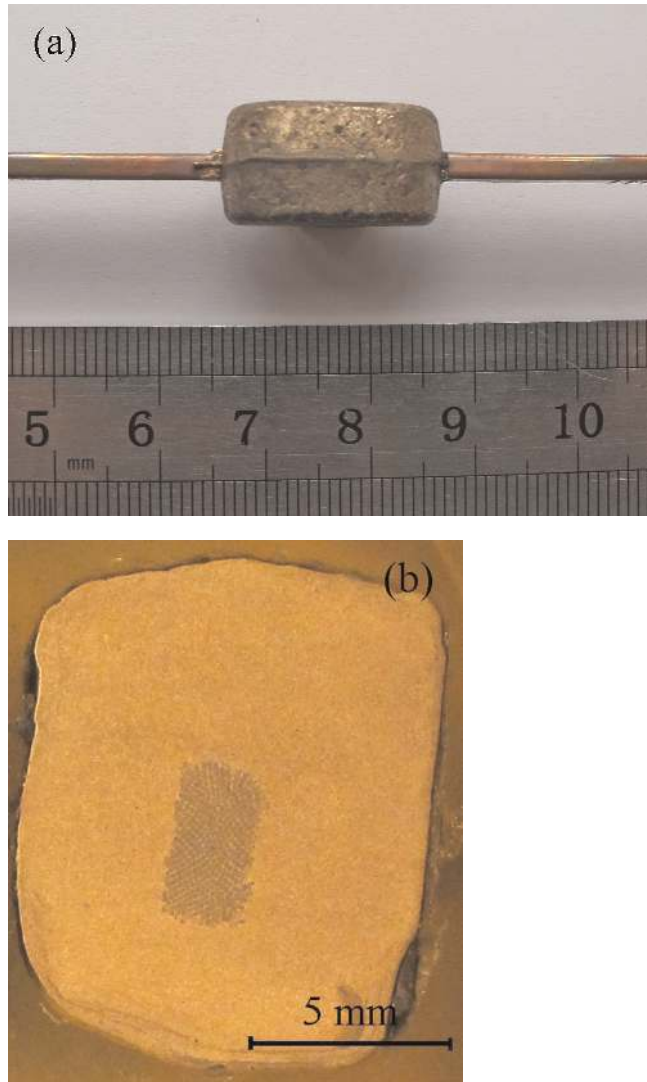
Thermite welded joint of Cu–Nb microcomposite wire: (a) front view; (b) cross- section of joint.
